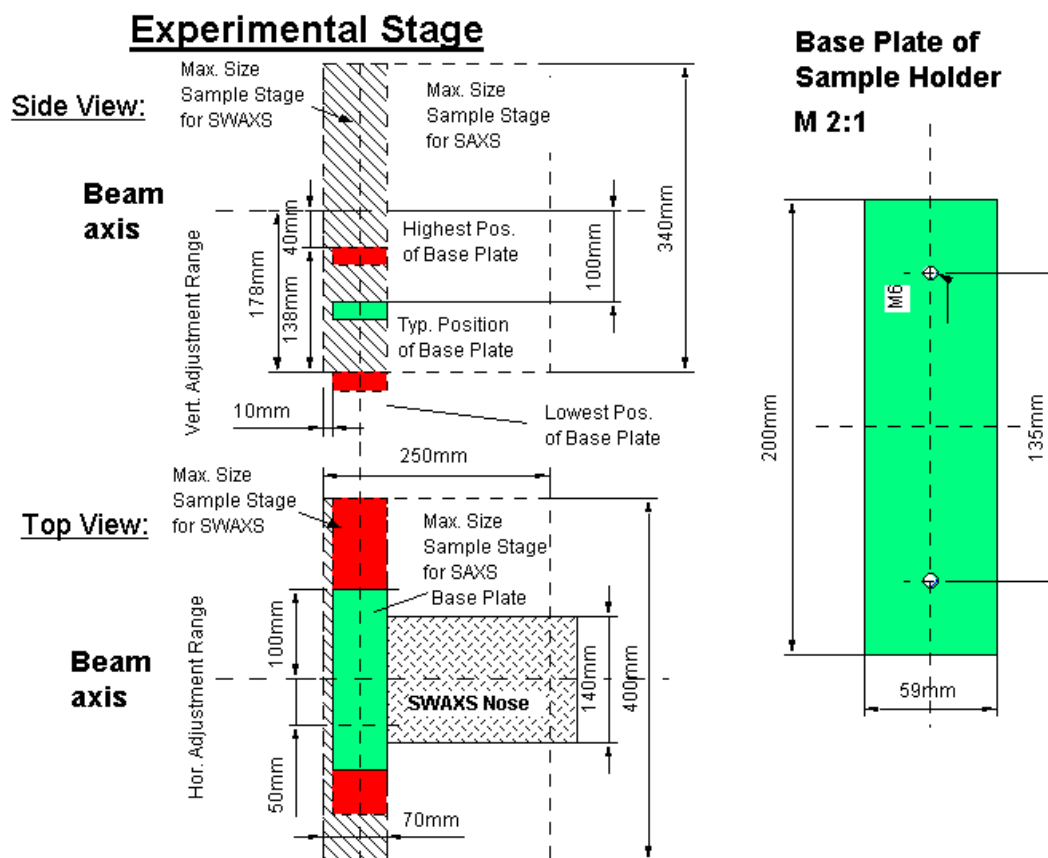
Maximum dimensions and alignment range of the sample holder to be mounted via a base-plate onto the standard alignment stage (left), and dimensions of the base-plate (right).
